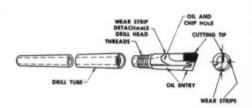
Special design for a short drill which can be rotated instead of rotating the work. Cutting angles are comparable to those used in stationary drills; chips are carried out through center of drill instead of an external flute.
